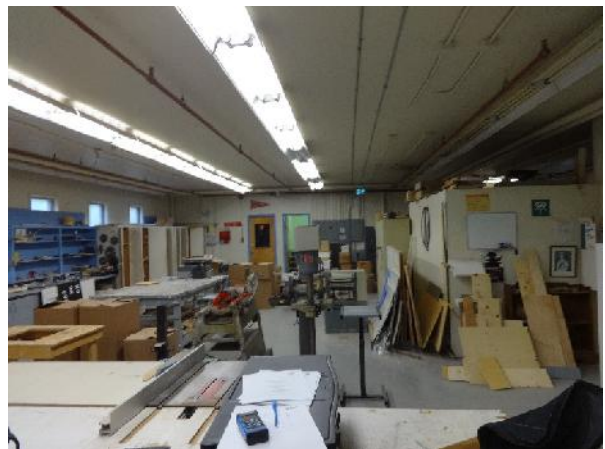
View of interior portion of Trade Shop with ceiling height of approximately 3.0 m.
